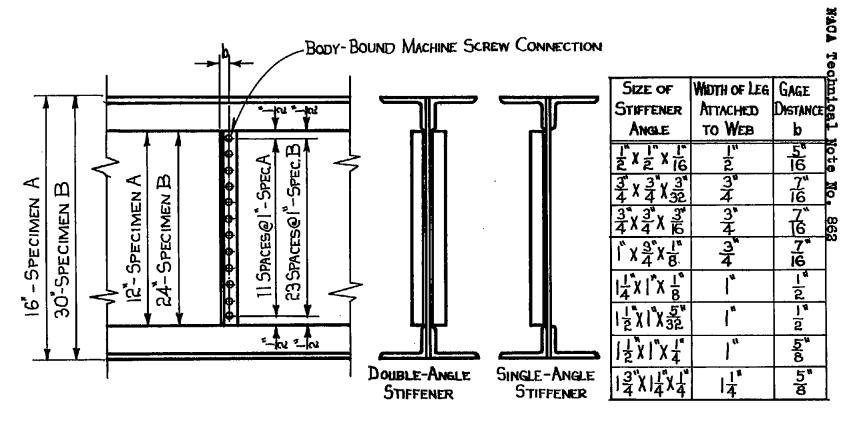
PLATE GIRDER FOR STIFFENER TESTS - SPECIMEN B.
